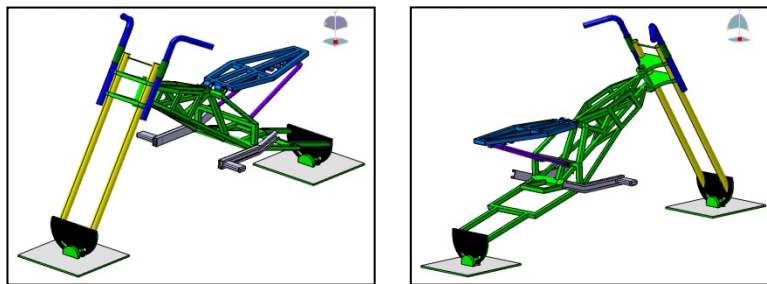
Initial CAD design concept of adjustable motorcycle test rig
